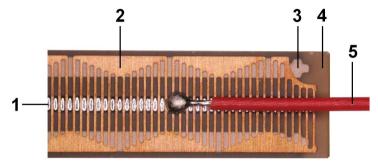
Example view of a special electrode (detail) with stranded wire soldered to soldering strip
